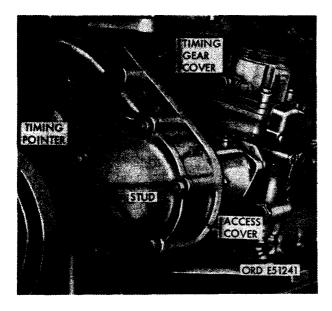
INSTALLING FUEL INJECTION PUMP DRIVEN GEAR ACCESS COVER.
